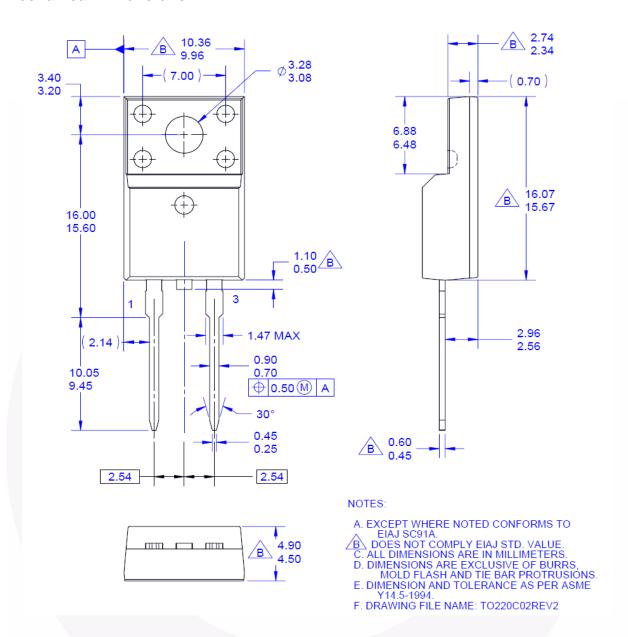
TO-220F 2L - 2LD; TO220; MOLDED; FULL PACK
